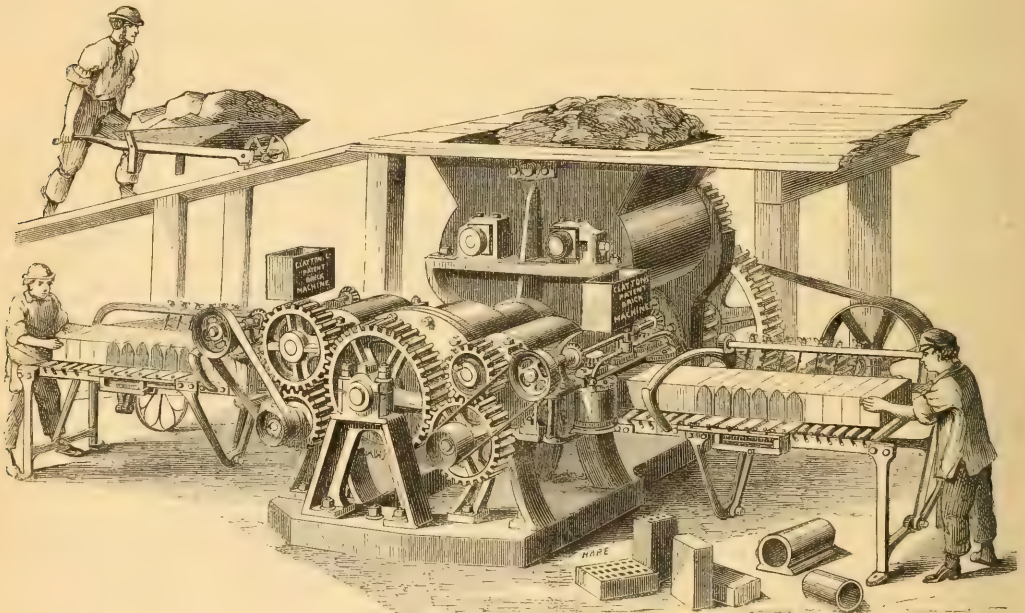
H. CLAYTON & CO.'S PATENT BRICK-MAKING MACHINE.
